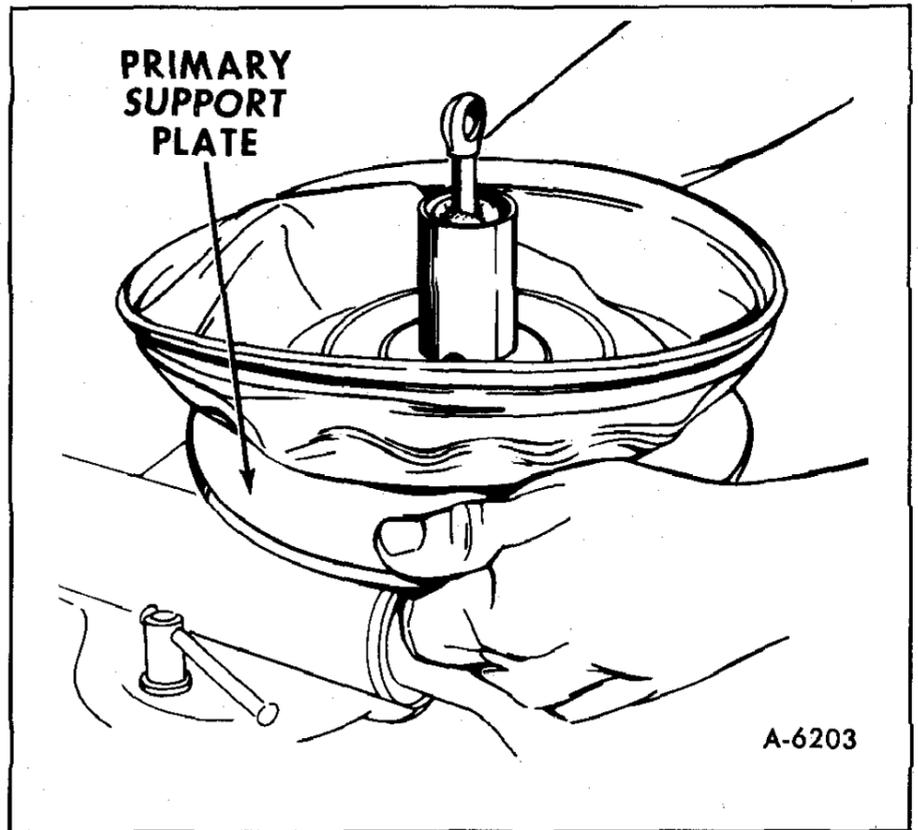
Locking or Unlocking Primary Support Plate from Primary Power Piston
